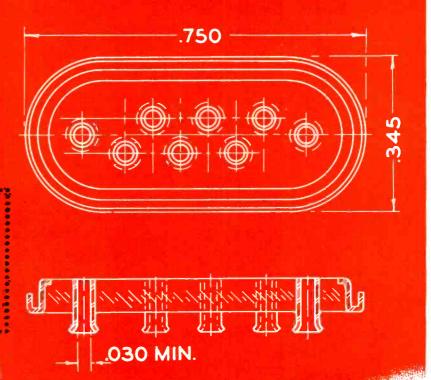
Schematic-mechanical drawing of the special cathode ray tube
